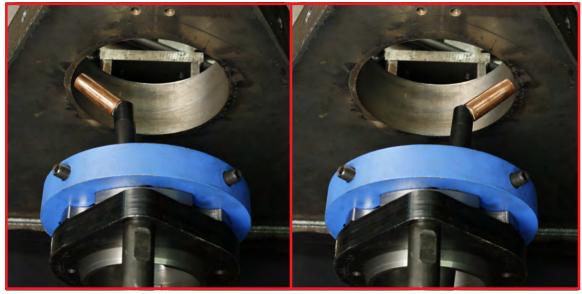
SWINGING THE BORE WELDER TO ATTAIN CENTER
